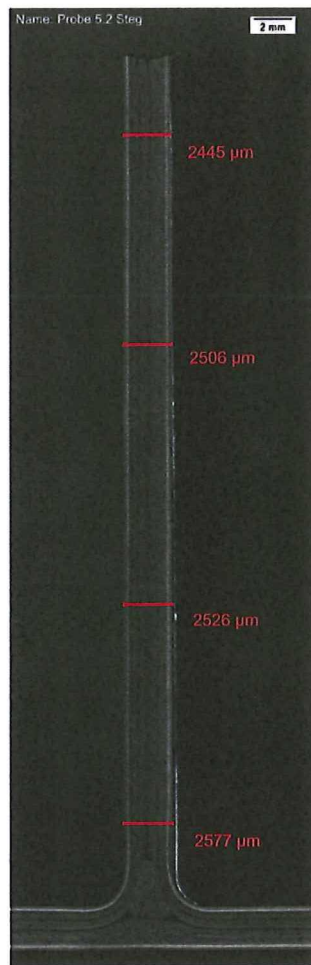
Cross section of panel 14 stringer 2 skin
